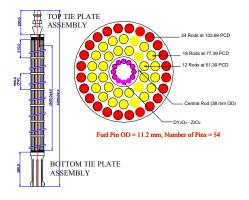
54-rod Bundle Assembly and Cross-Sectional View
